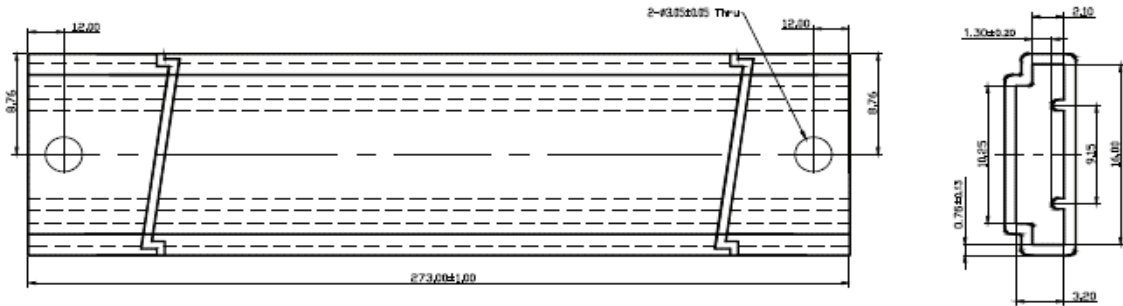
Tube dimensions for L2C5-xxxxxL02FH6xx
